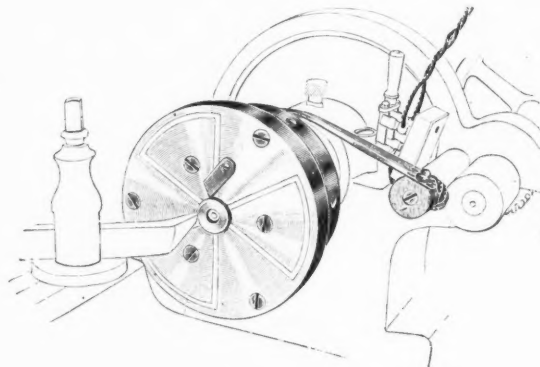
CHUCK FOR LATHE OR GRINDER.
